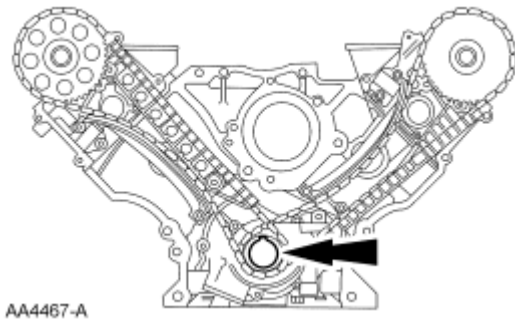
Crankshaft With Keyway At 12 O'clock Position
